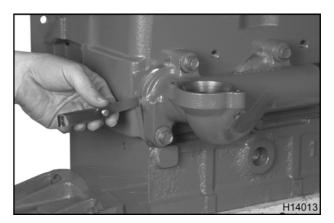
Checking exhaust manifold for cracks and warpage
